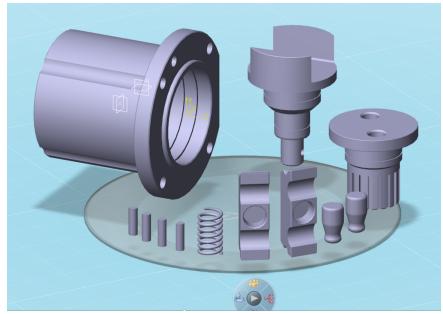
Case Study Product Parts Exploded View on CATIA V6
